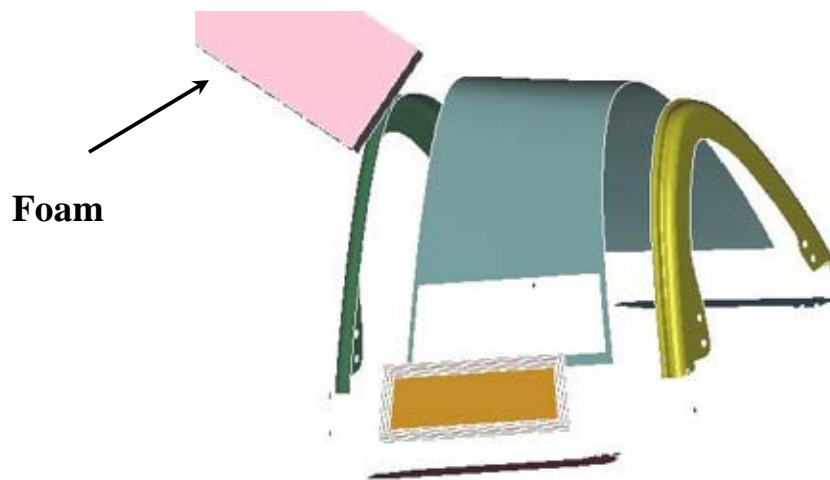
Exploded view of parts of the LS-DYNA model including foam, left and right ribs, front and back flanges or spars, main panel, and front lower doubler region.
